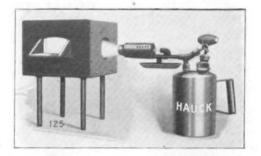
Illustrates the No. 14 Hauck welded steel kerosene torch, with heating furnace.
